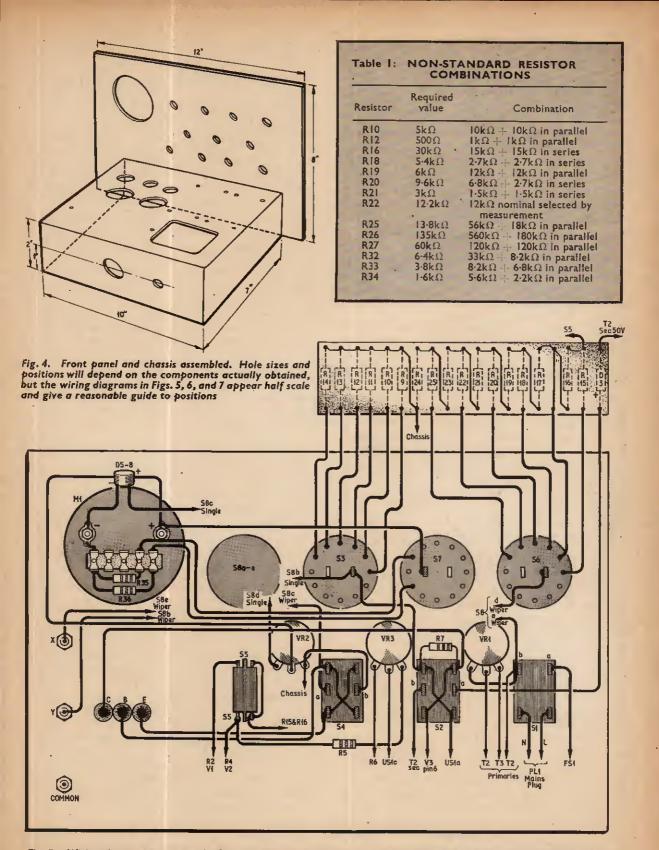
Wiring the components on the front panel. The component group board is tilted up to show connections, but is in fact fitted to brackets on the front panel. This drawing appears approximately half scale
